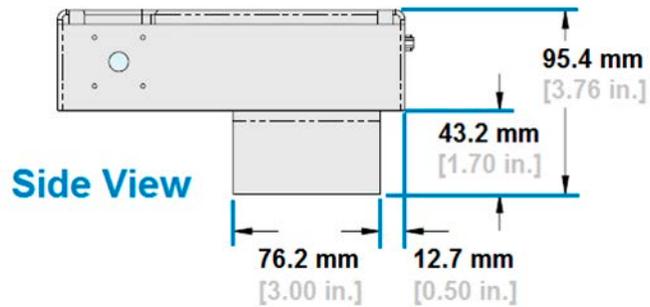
Dimensions – OEM Heat Sink, Side View
